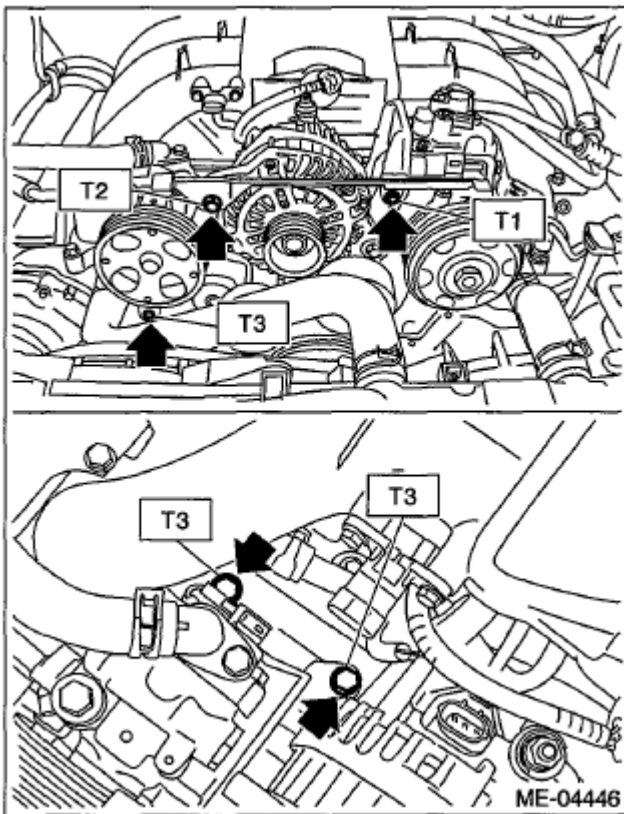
Locating Power Steering Pump Mounting Pins With Torque Specifications
